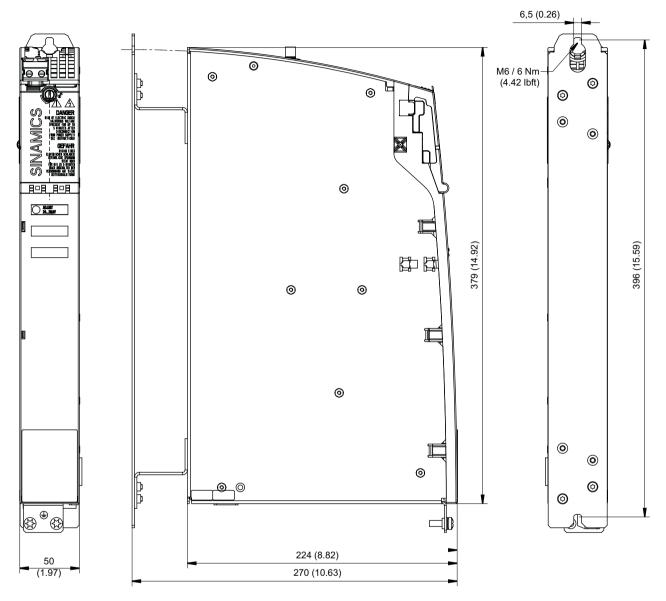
Dimension drawing of the SF Capacitor Module Booksize, all dimensions in mm and (inches)
